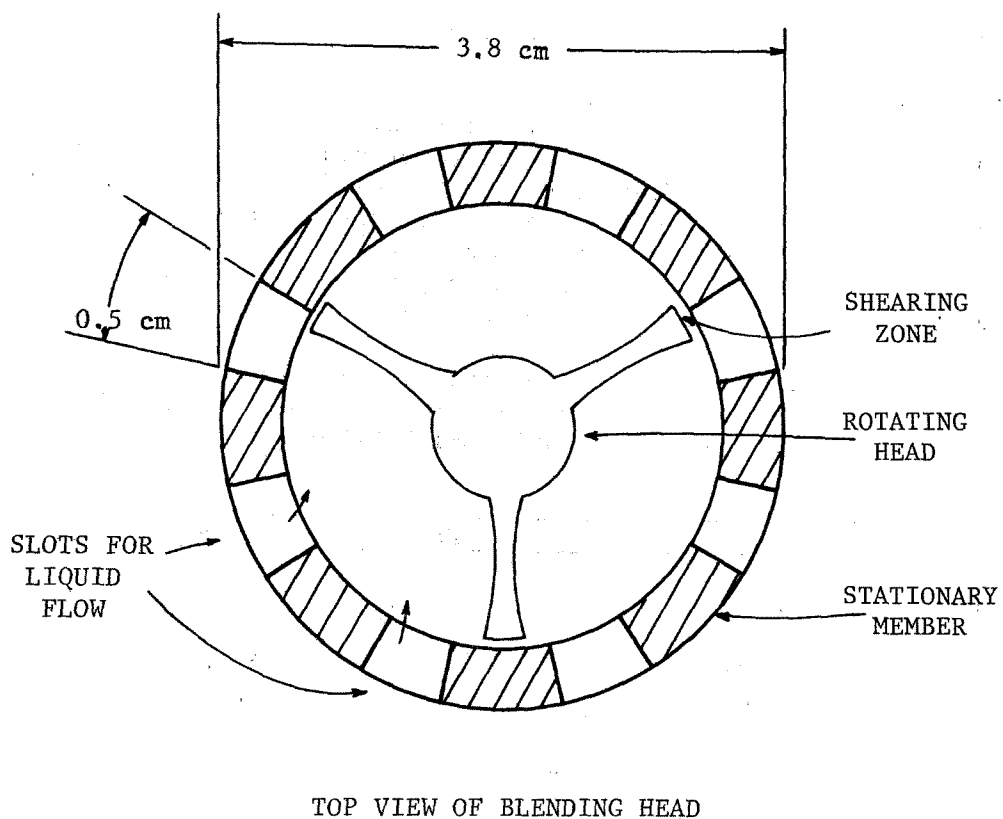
Schematic of shear-type blender head located inside blending container utilized for raw waste sample preparation, stainless steel construction.
